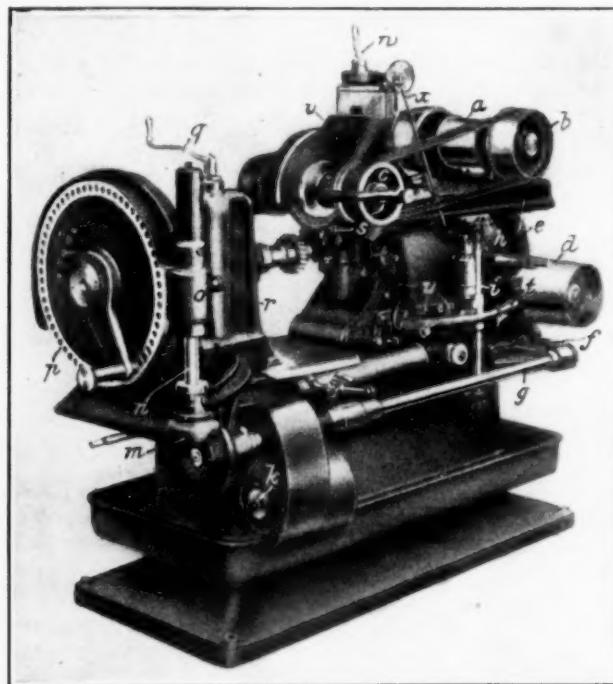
AUTOMATIC MACHINE FOR GRINDING TOOTHED WHEELS
